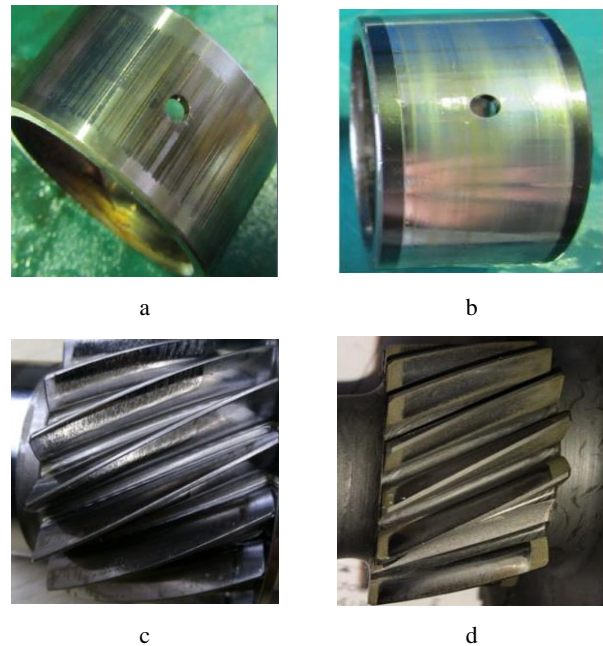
Examples of spray and manganese phosphate coating modification: a–needle-bearing outer ring prior to treatment macroscopic morphology; b–graphite/ MoS_2 after treatment macroscopic morphology; c–gear surface before treatment through testing for 1.2×10^6 cycles; d–manganese phosphate after treatment through 1.2×10^7 cycles
